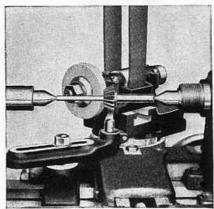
Sharpening an Angular Cutter on the 11-inch Lathe
